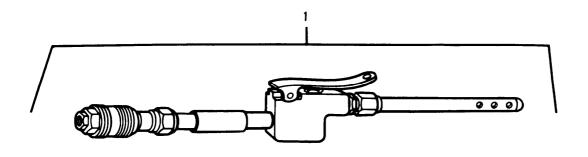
V-PACK CLEANER ASSEMBLY.
